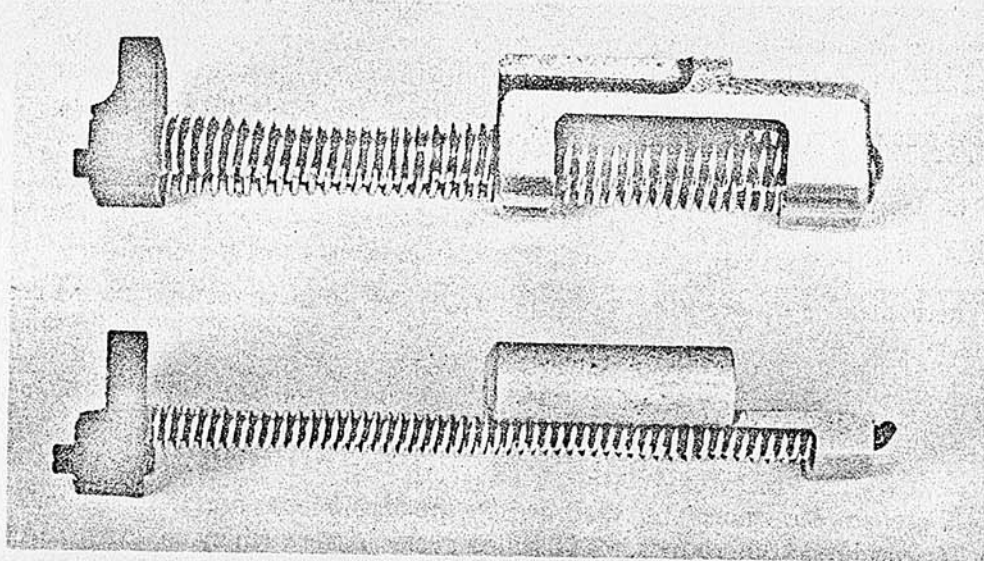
Side View of The Modified Follower Assembly (TOP) and the Original Assembly (BOTTOM).
